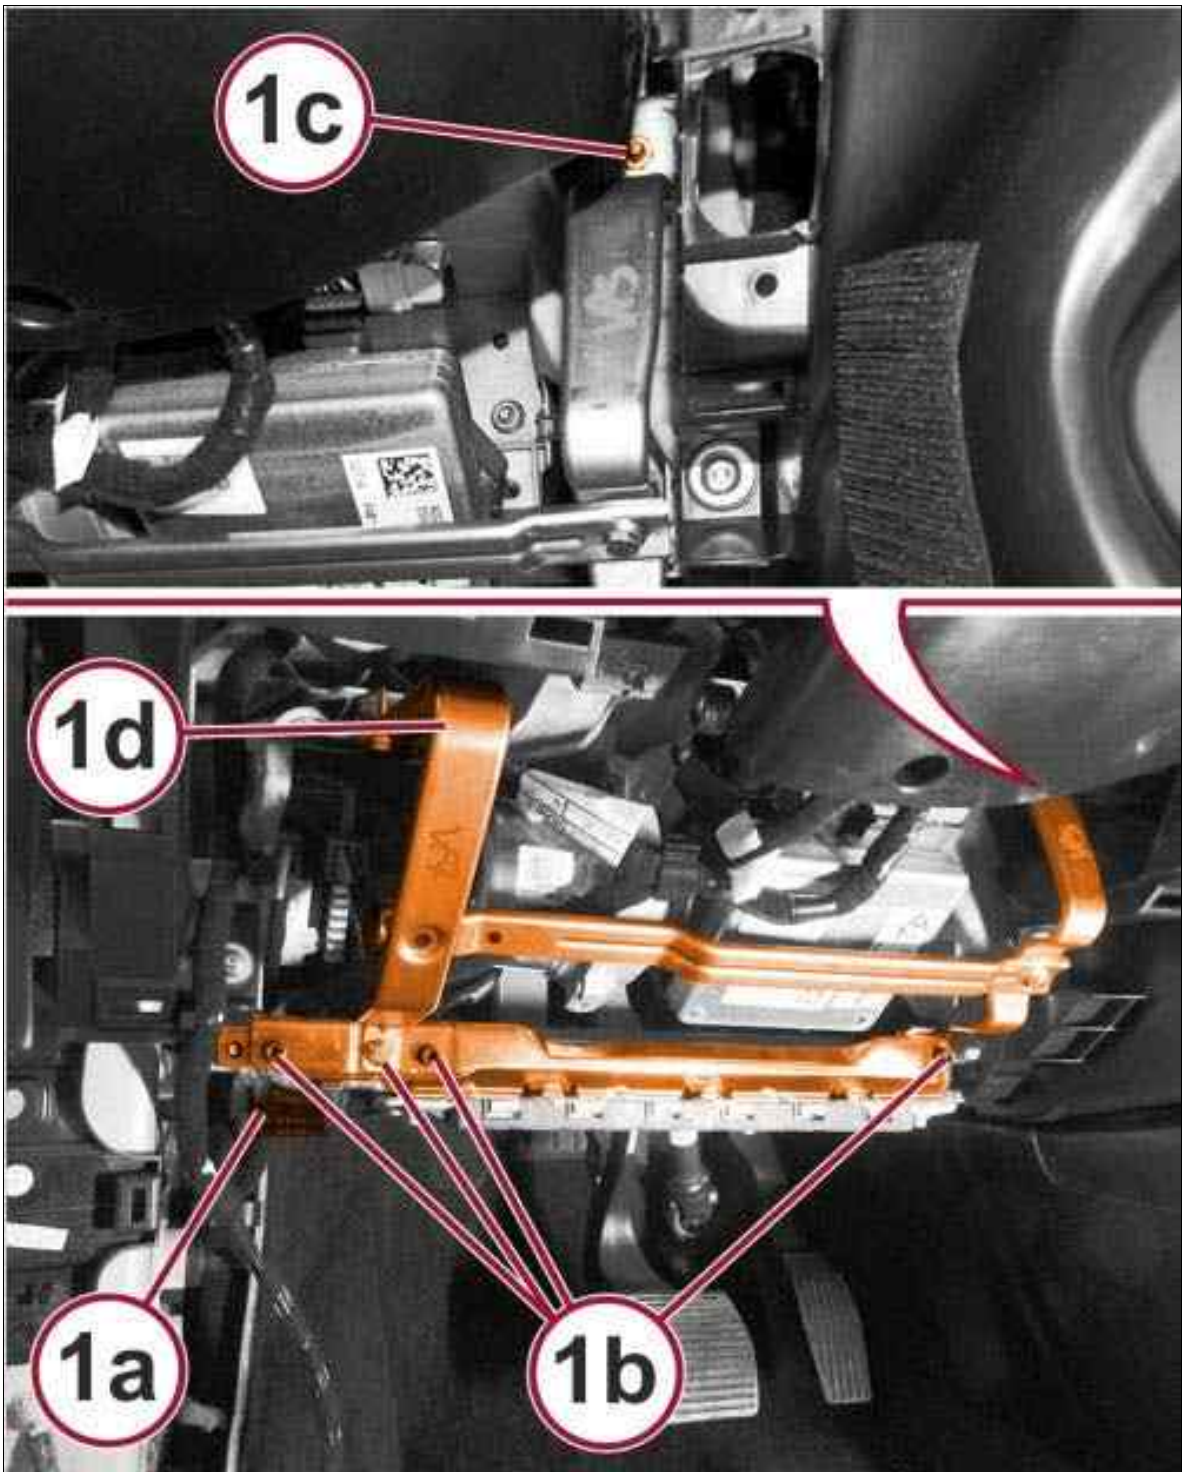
Remove/Install Air Outlet Temperature Sensor - Upper Left
